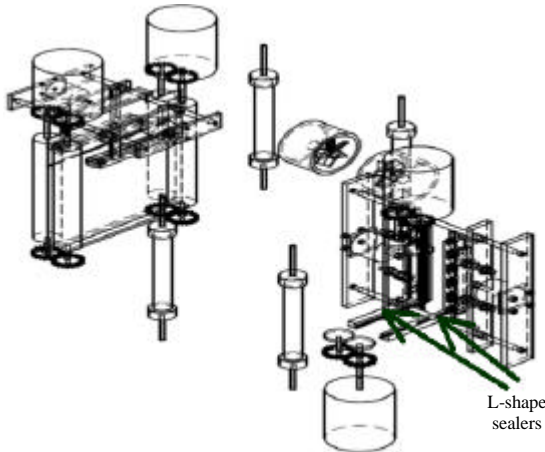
Zip lock sealing (left) and L-shape side sealing (right)
